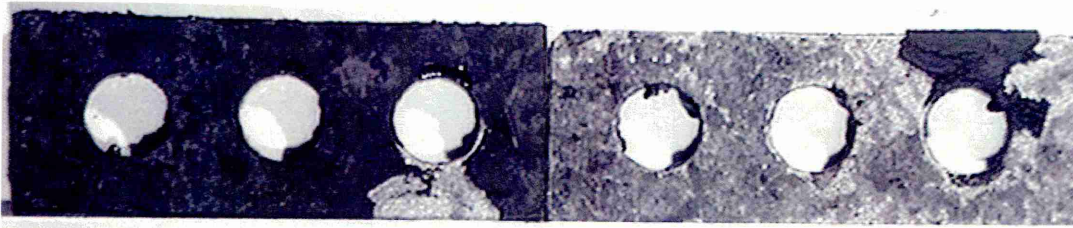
Alumina grit blast + AZS fracture surface after environmental exposure
